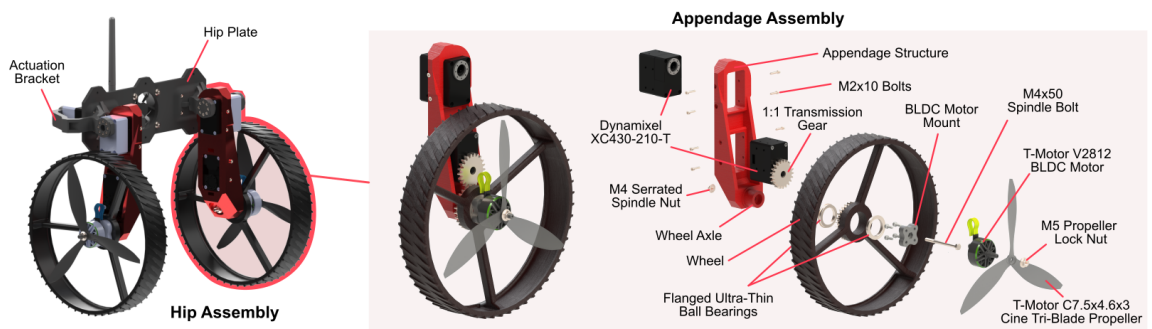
Detailed view of the robot appendage, including hip assembly (left) and exploded appendage assembly (right). The hip assembly integrates a dual-servo actuation mechanism mounted to the hip plate. The appendage assembly features a Dynamixel XC430-210-T servo coupled to a 1:1 transmission gear, enabling rotation of the wheel about the appendage axis. A BLDC motor (T-Motor V2812) mounted inside the wheel hub drives a tri-blade propeller (T-Motor C7.5x4.6x3) for aerial locomotion. Structural components include the appendage frame, joint bracket, and flanged ultra-thin ball bearings for low-friction wheel rotation. All parts interface using standard fasteners and spindle bolts for ease of assembly and maintenance.
